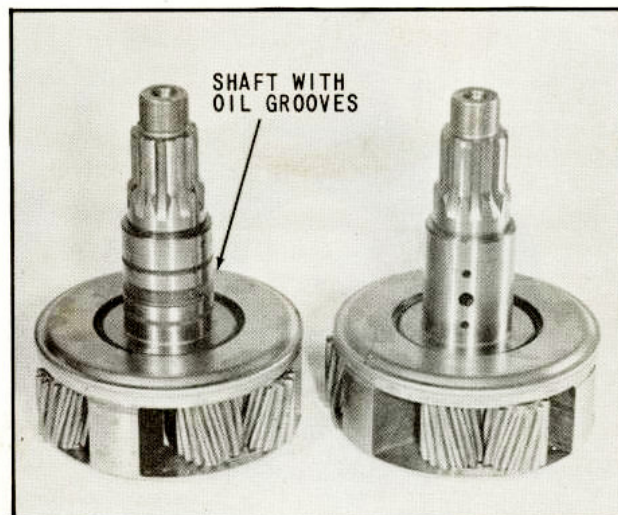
Late and Early Model Pinion Cage and Output Shaft
